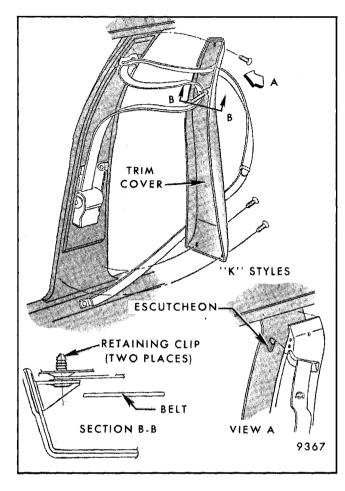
Center Pillar Trim Cover - Removal and Installation - Cadillac K Style
